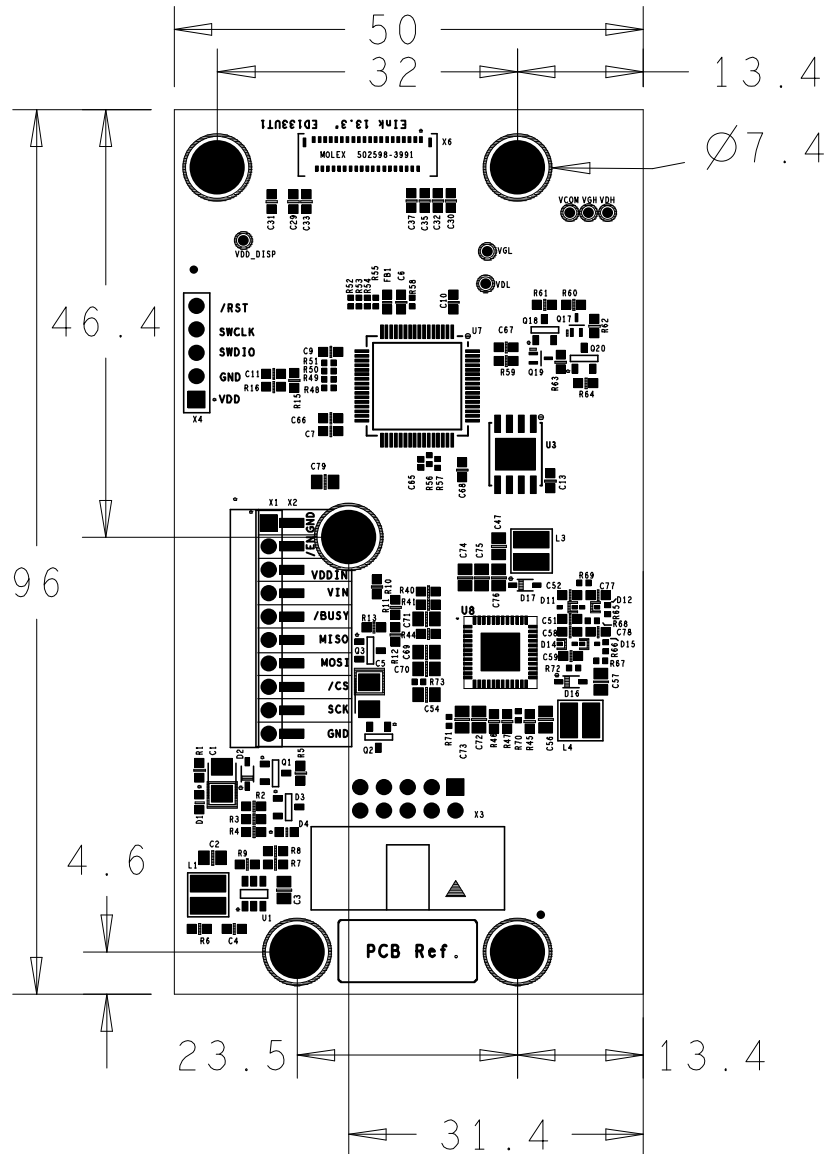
TCM2-E133-320 Outline (all dimensions in mm)
